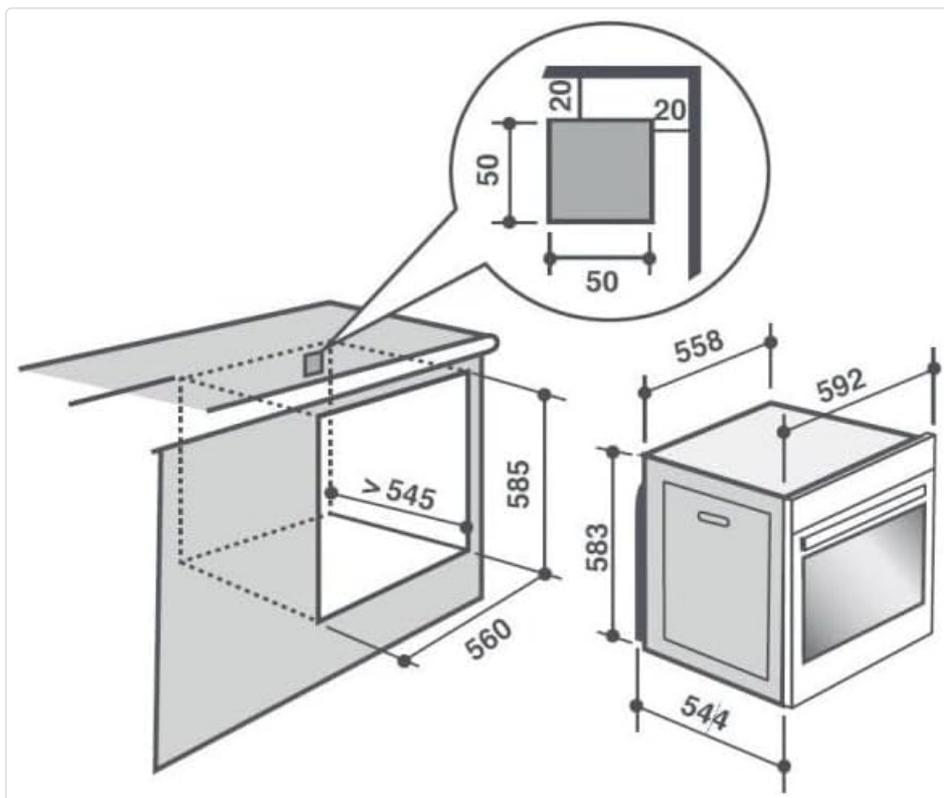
Installation dimensions for the SAUTER SOP6214LX oven. The diagram illustrates the required cutout dimensions for the cabinet (e.g., >545mm depth, 560mm width, 585mm height) and the oven's external dimensions (e.g., 592mm height, 558mm width, 544mm depth).
